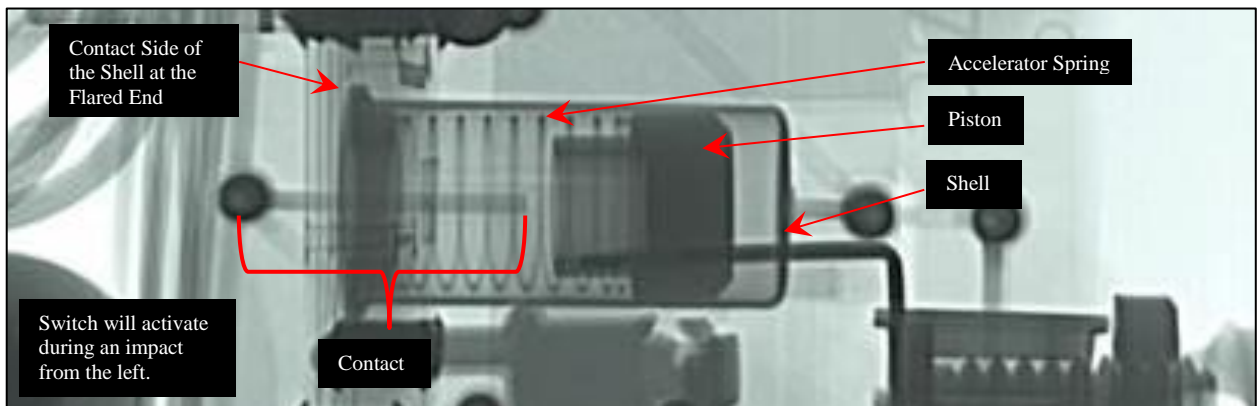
, X-ray of 5-Axis G-Switch, Parts Description
